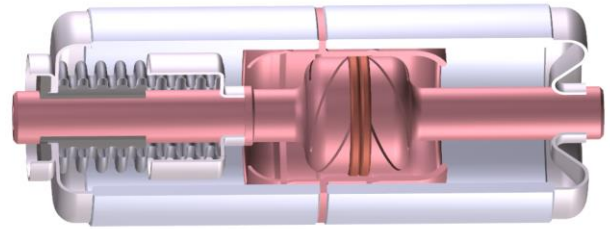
Contemporary 1990's onwards VI with Alumina ceramic insulator, brazed assembly, OSSO vacuum furnace seal-off of batches.
